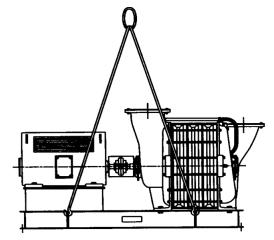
Fastening the lifting gear with eye bolts to the machine group
